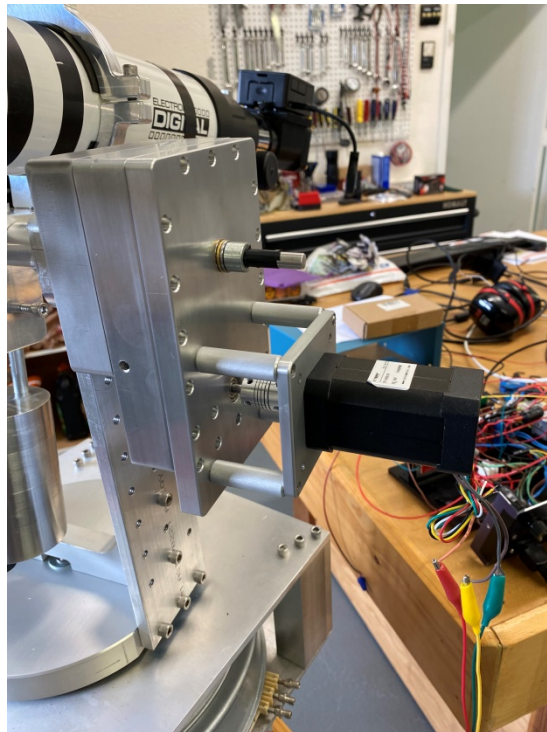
Fully assembled elevation axis drive motor. With the harmonic drive additions, the completed harmonic drive chassis is about 1" thicker than the original chassis shown in Figure 5.
